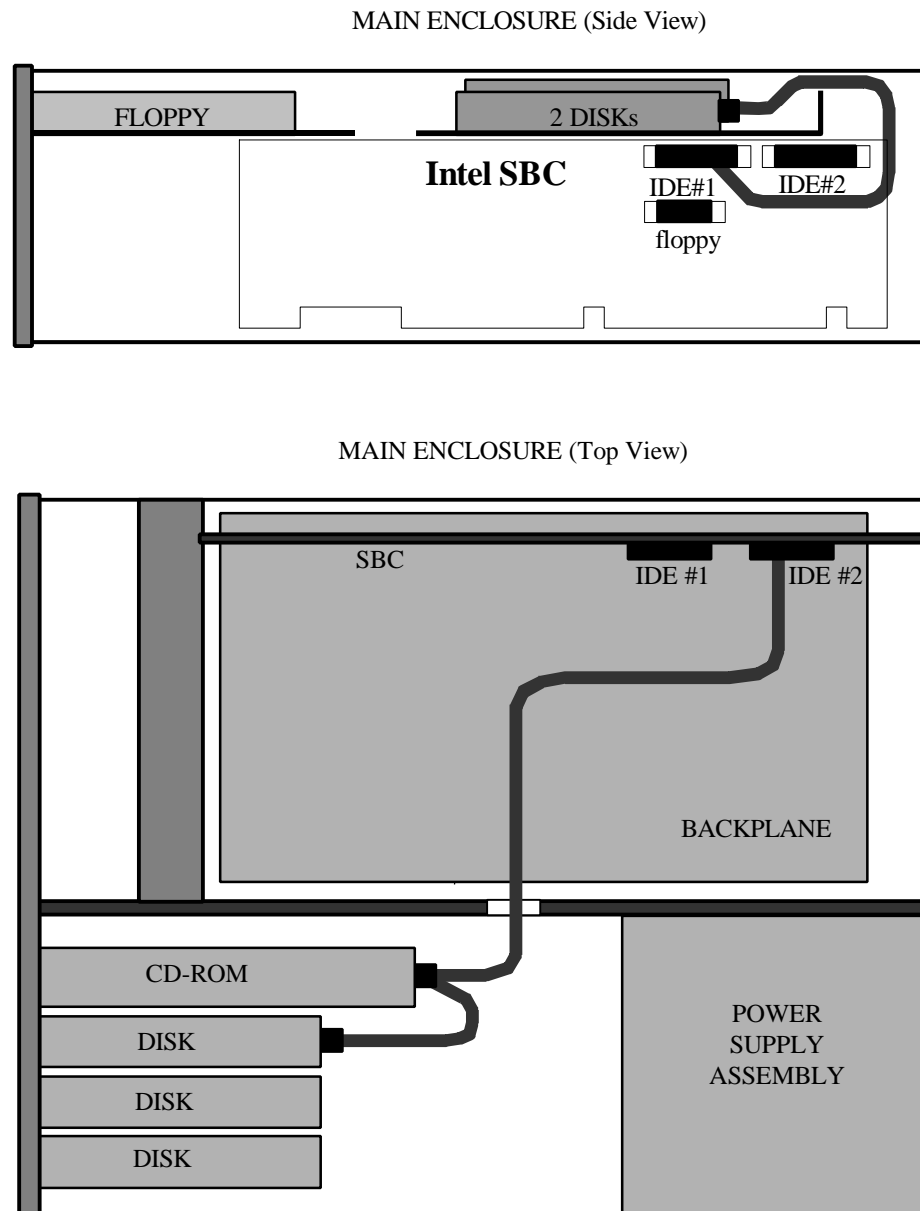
Cable Routing to Disk Drives and CD-ROM Drive in the Front Access Drive Bays
